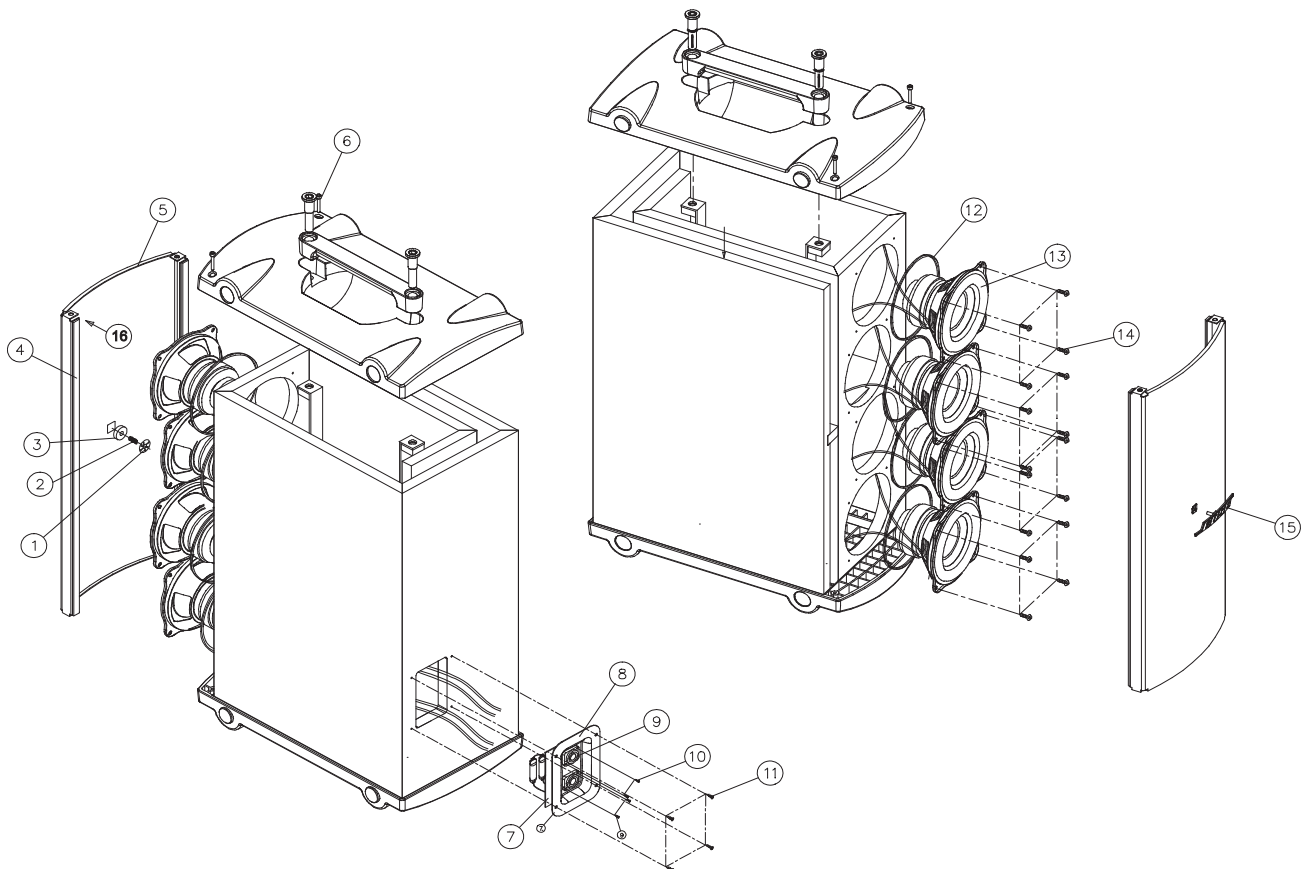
Panaray® MB4 Bass Loudspeaker Exploded View
